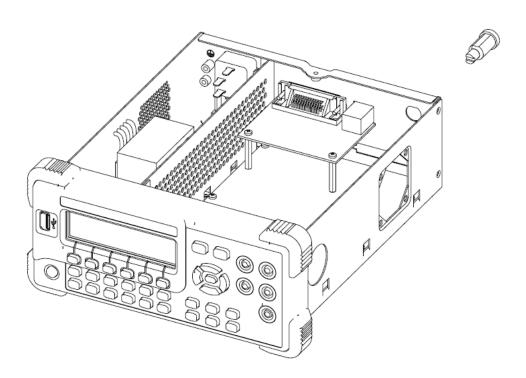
The Schematic of Disassembling and Assembling Fuse Socket
